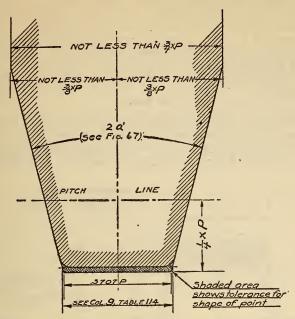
Shape for cutter or single point lathe tool, Acme threads
